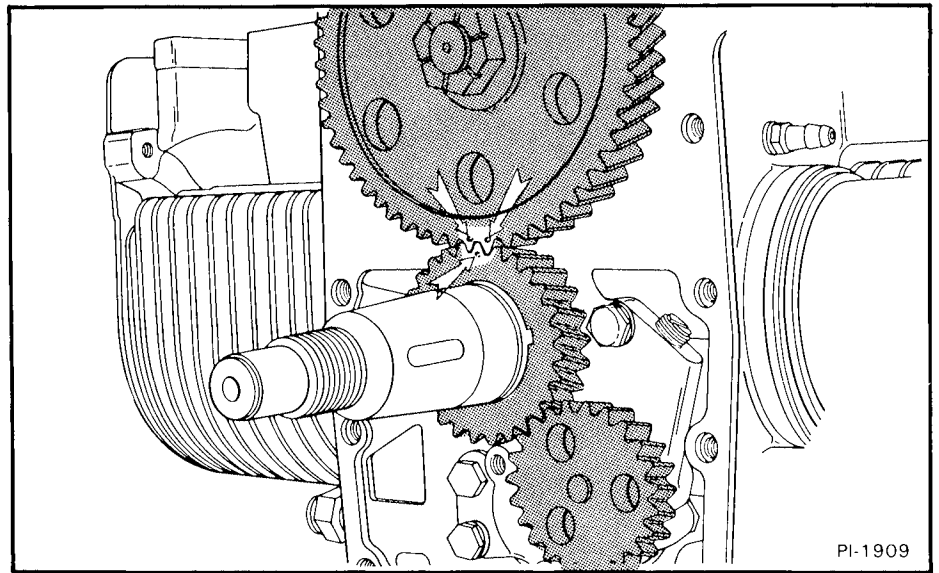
Alignment of the Crank and Cam Gear Marks
